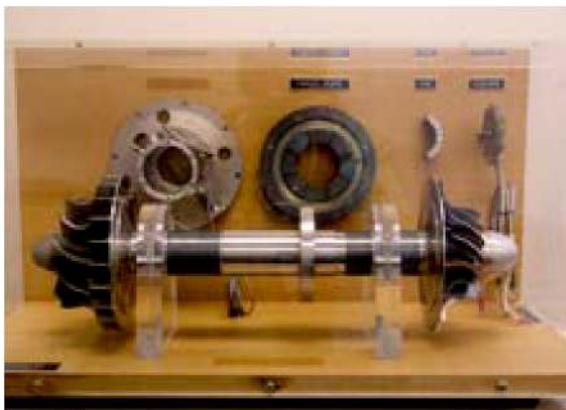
15 kW Brayton Rotating Unit (BRU) turbine using foil bearings in place of rigid gas bearings.
